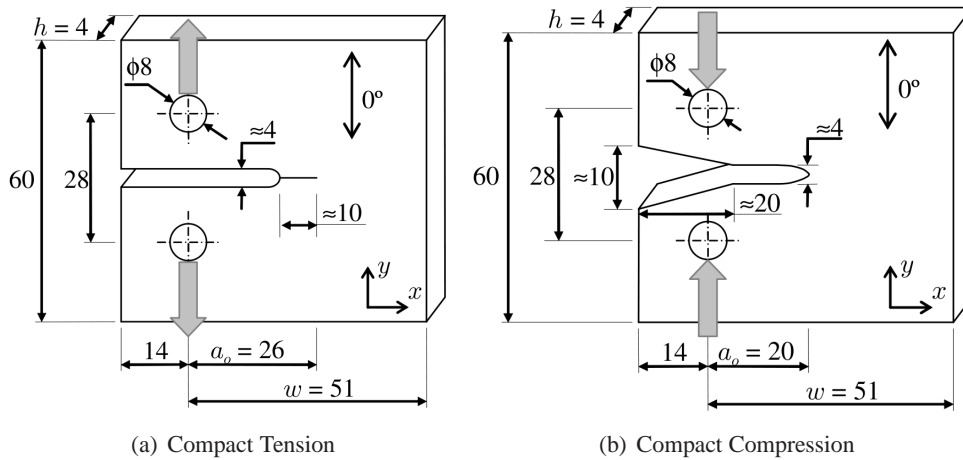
Test specimen nominal dimensions (in mm) for the a) tensile and b) compressive fiber-breaking fracture toughness tests. [119]
